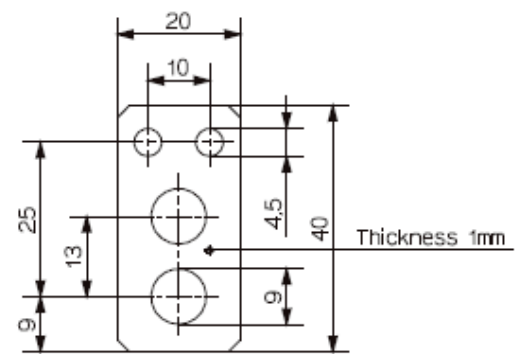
Mounting plate (Art. No. 3.520.1015)
